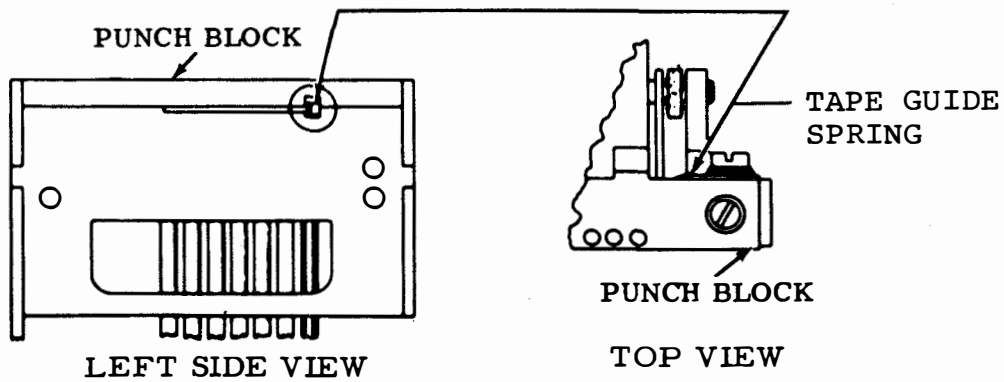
Tape Guide Spring (Punch Block) (Fully Perforated Tape Mechanism)
